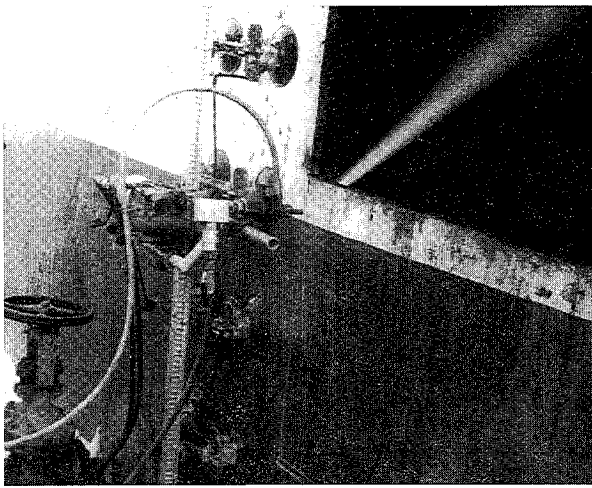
Abrasive cutting head and linear tracking device, secured to tank wall with pneumatic suction cups, cutting manway or door sheet for entry.
